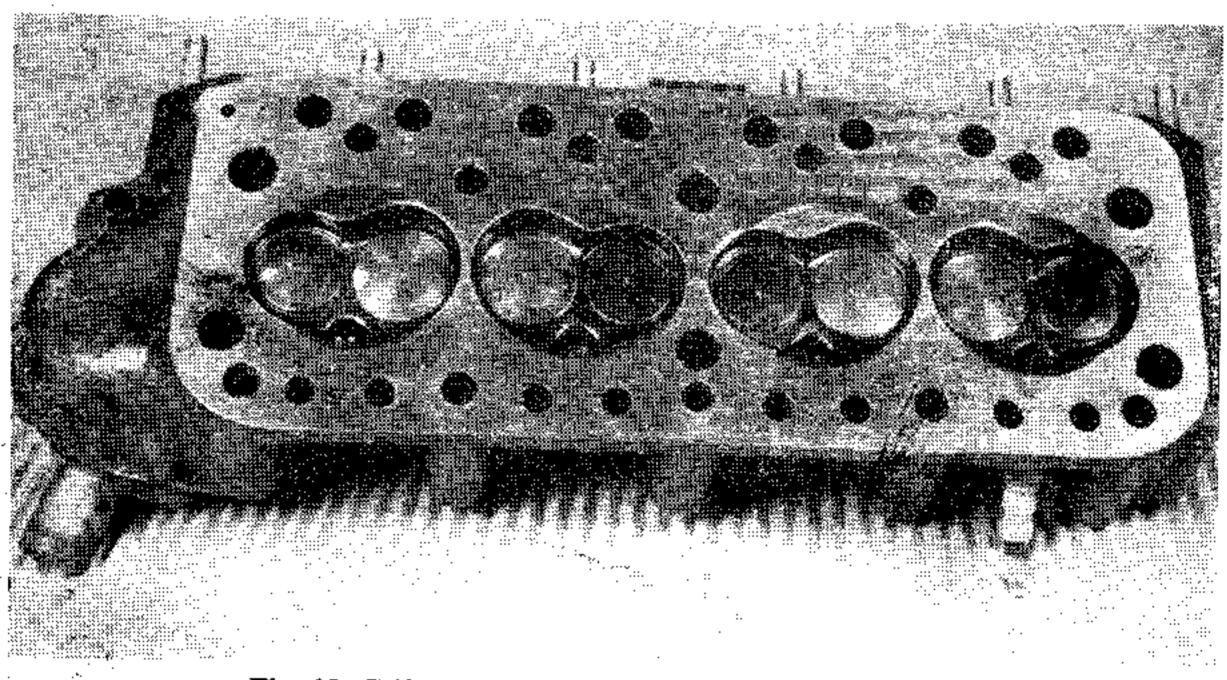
Cylinder-head, MGA 1600 Mk II, bottom view
